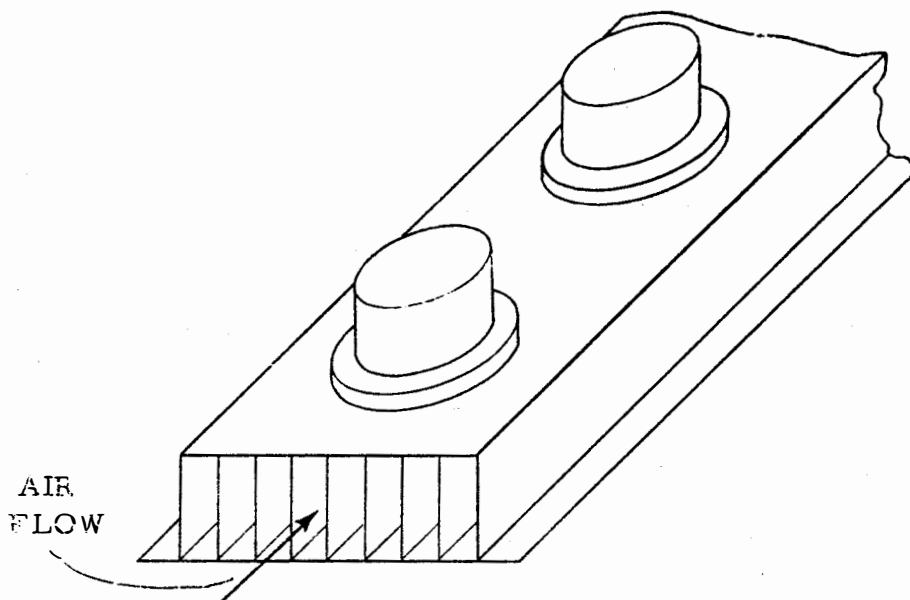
Transistors Mounted on a Heat Exchanger Chassis.
